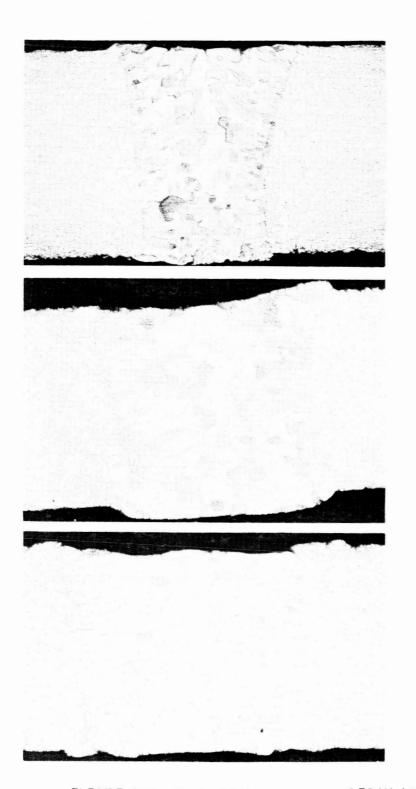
Bend Test Results on EB Welds in Powder Metallurgy W-25Re-30Mo Sheet. (4t Bend Radius)
